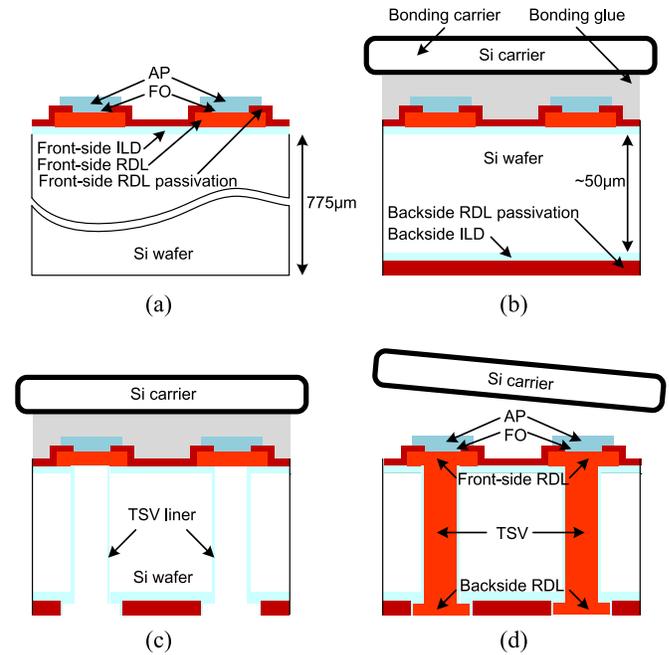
Process flow of the in-house developed 3-D IC via-last backside-TSV interposer. (a) Front-side process. (b) Wafer thinning and backside layer deposition. (c) TSV etching. (d) Carrier removing.
